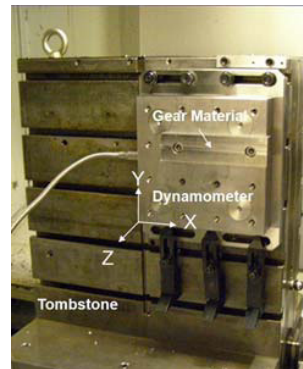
Machine test setup of work gear material machined using a Mori Seiki NH3600.
